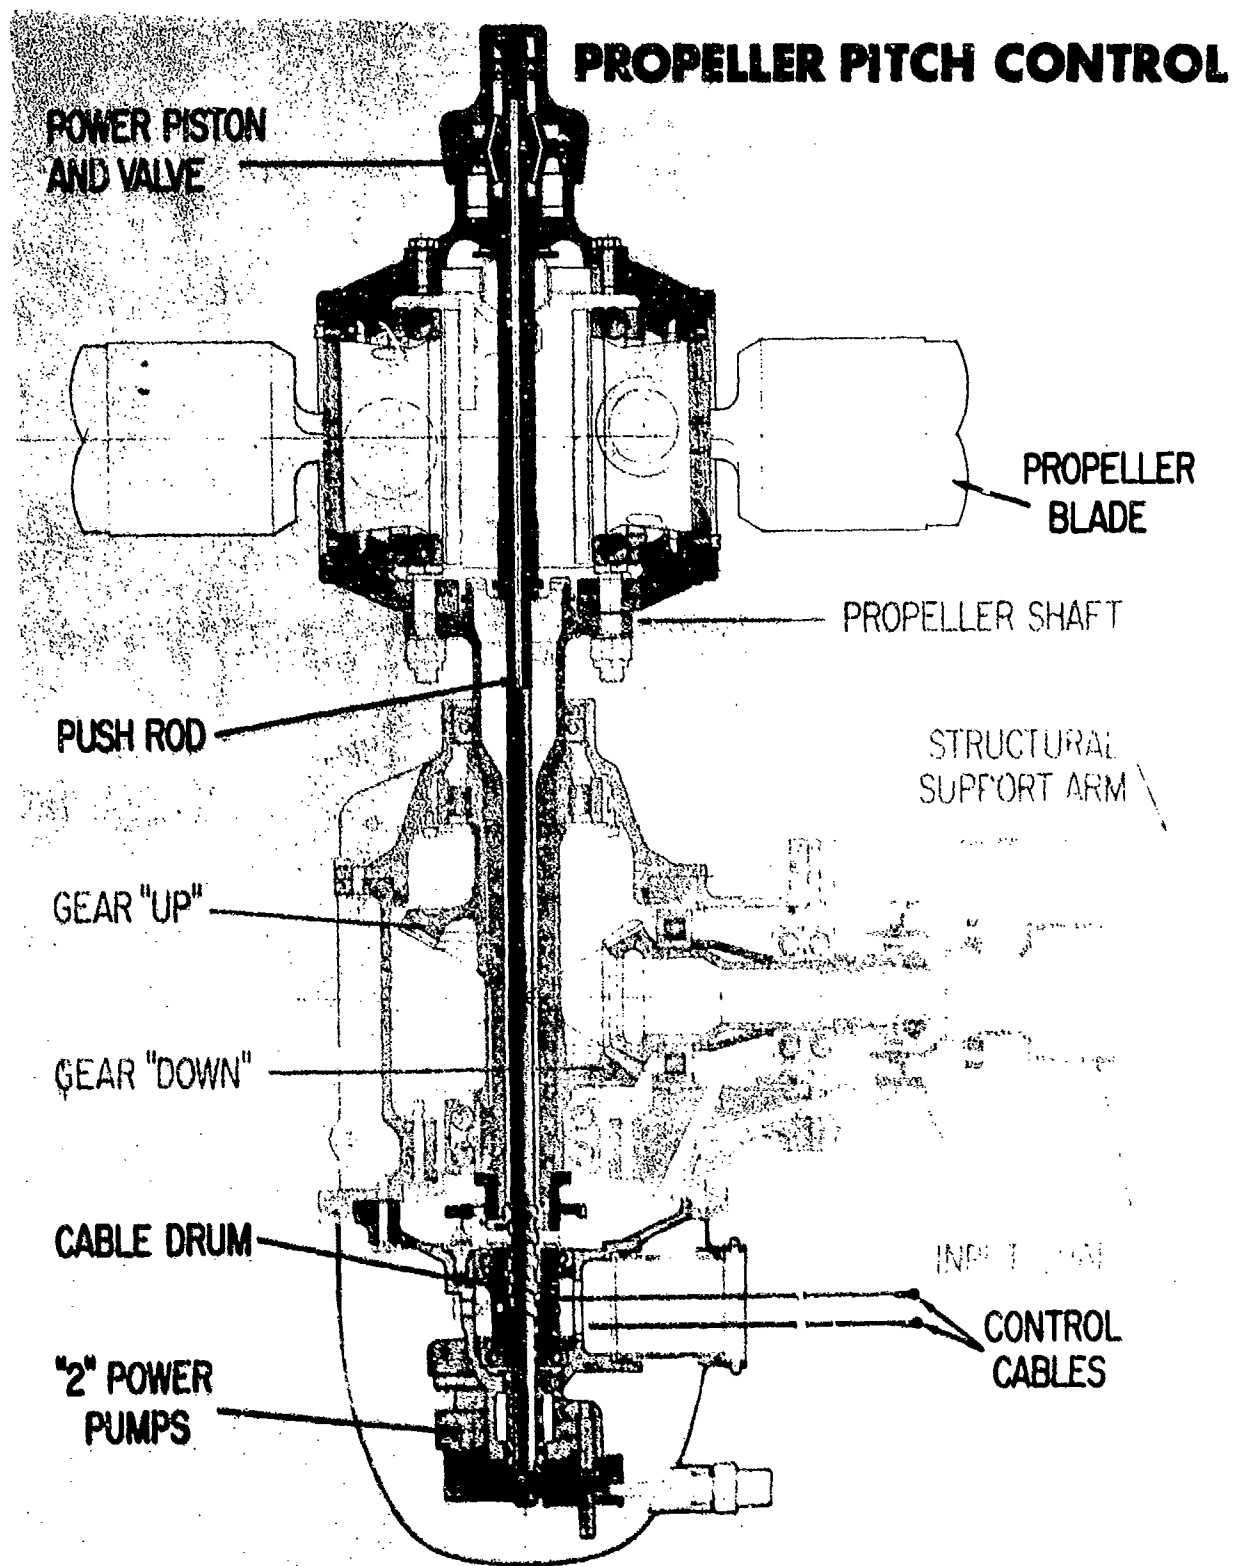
CUTAWAY VIEW OF PROPELLER PITCH CONTROL
